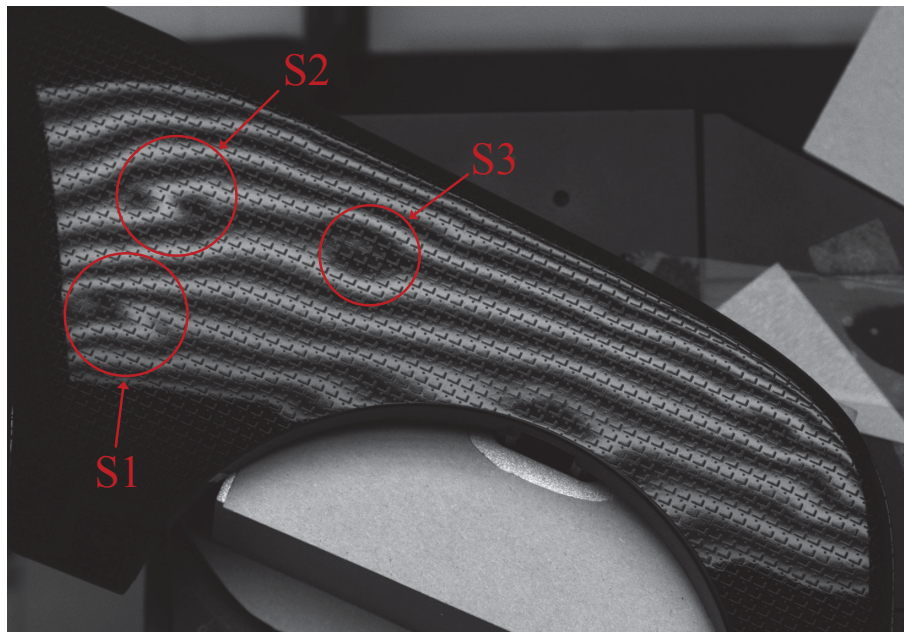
Front side of the injection molded part “Automotive Interior Front Panel” (courtesy of Schöfer GmbH) which is enveloped by a rectangle of $18 \times 8 \text{ cm}^2$. The inspected sink marks are shown in Figure 4.16.
